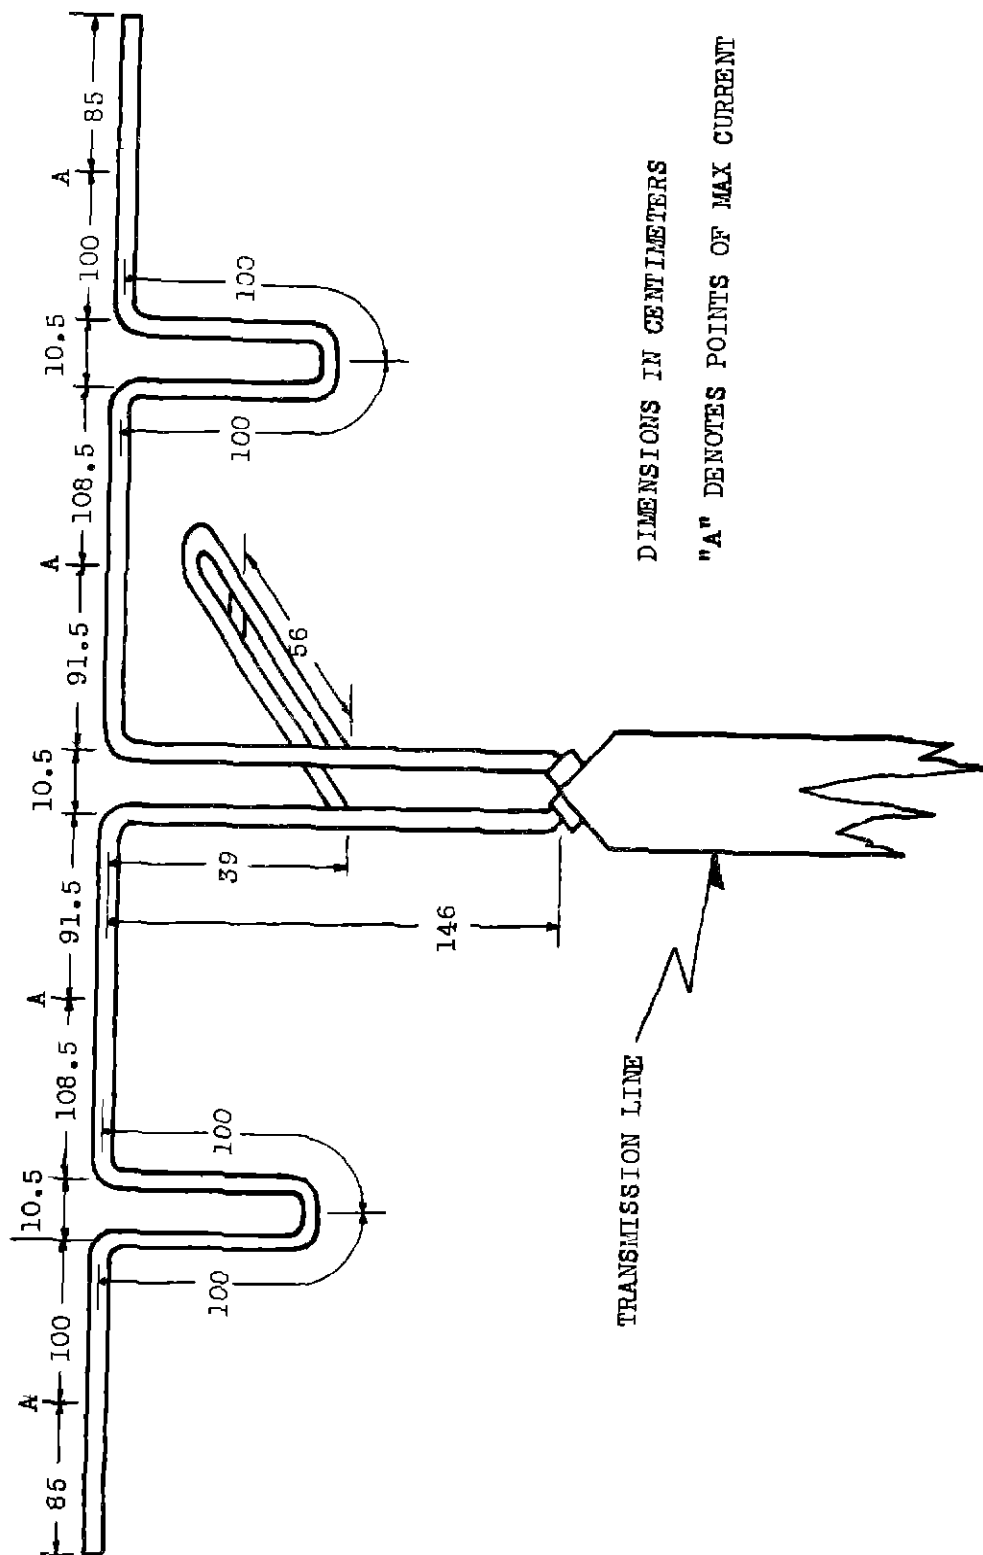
DRAWING SHOWING EXACT DIMENSIONS OF ANTENNA DETAILS
